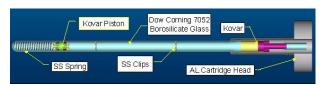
Sketch of PFMI Sample Ampoule Assembly (SAA)
